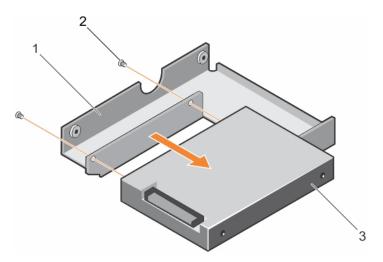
Removing a 2.5-inch hard drive from a 3.5-inch hard drive adapter
